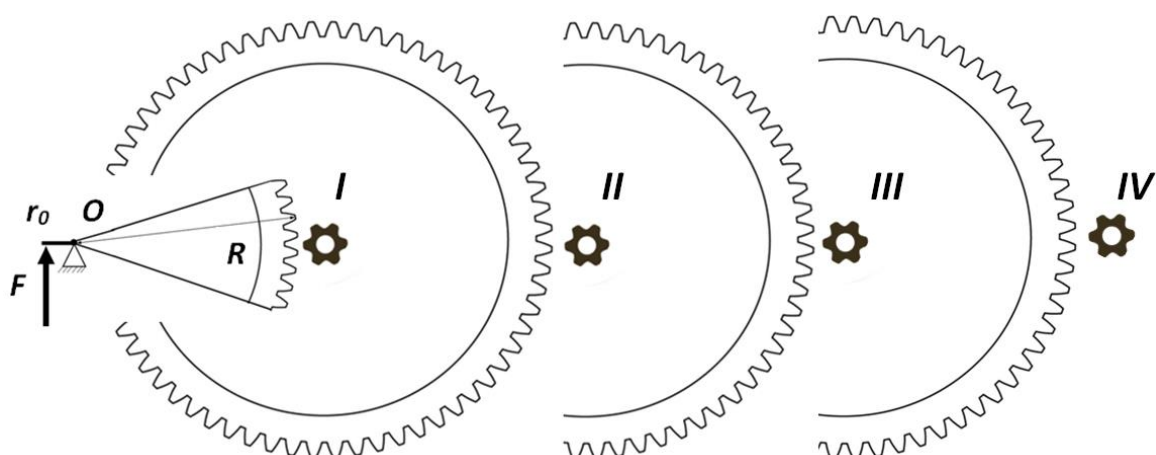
The scheme of the main part of the device. I, II, III - composite gears, IV - gear for connection with the generator shaft.
